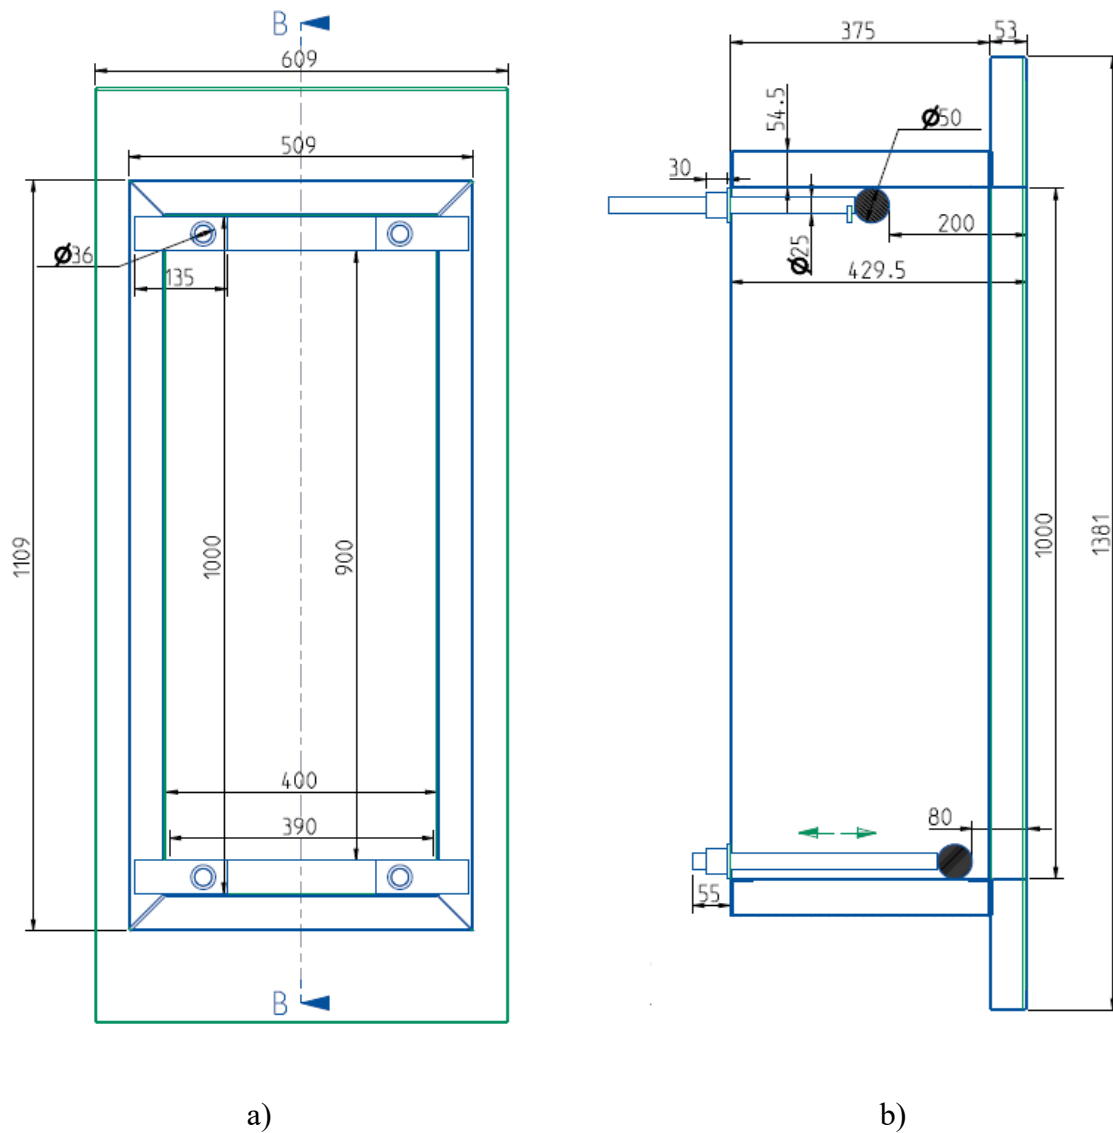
Drawing of the door adaptation: a) Frontal view; b) Side view – section B-B.
